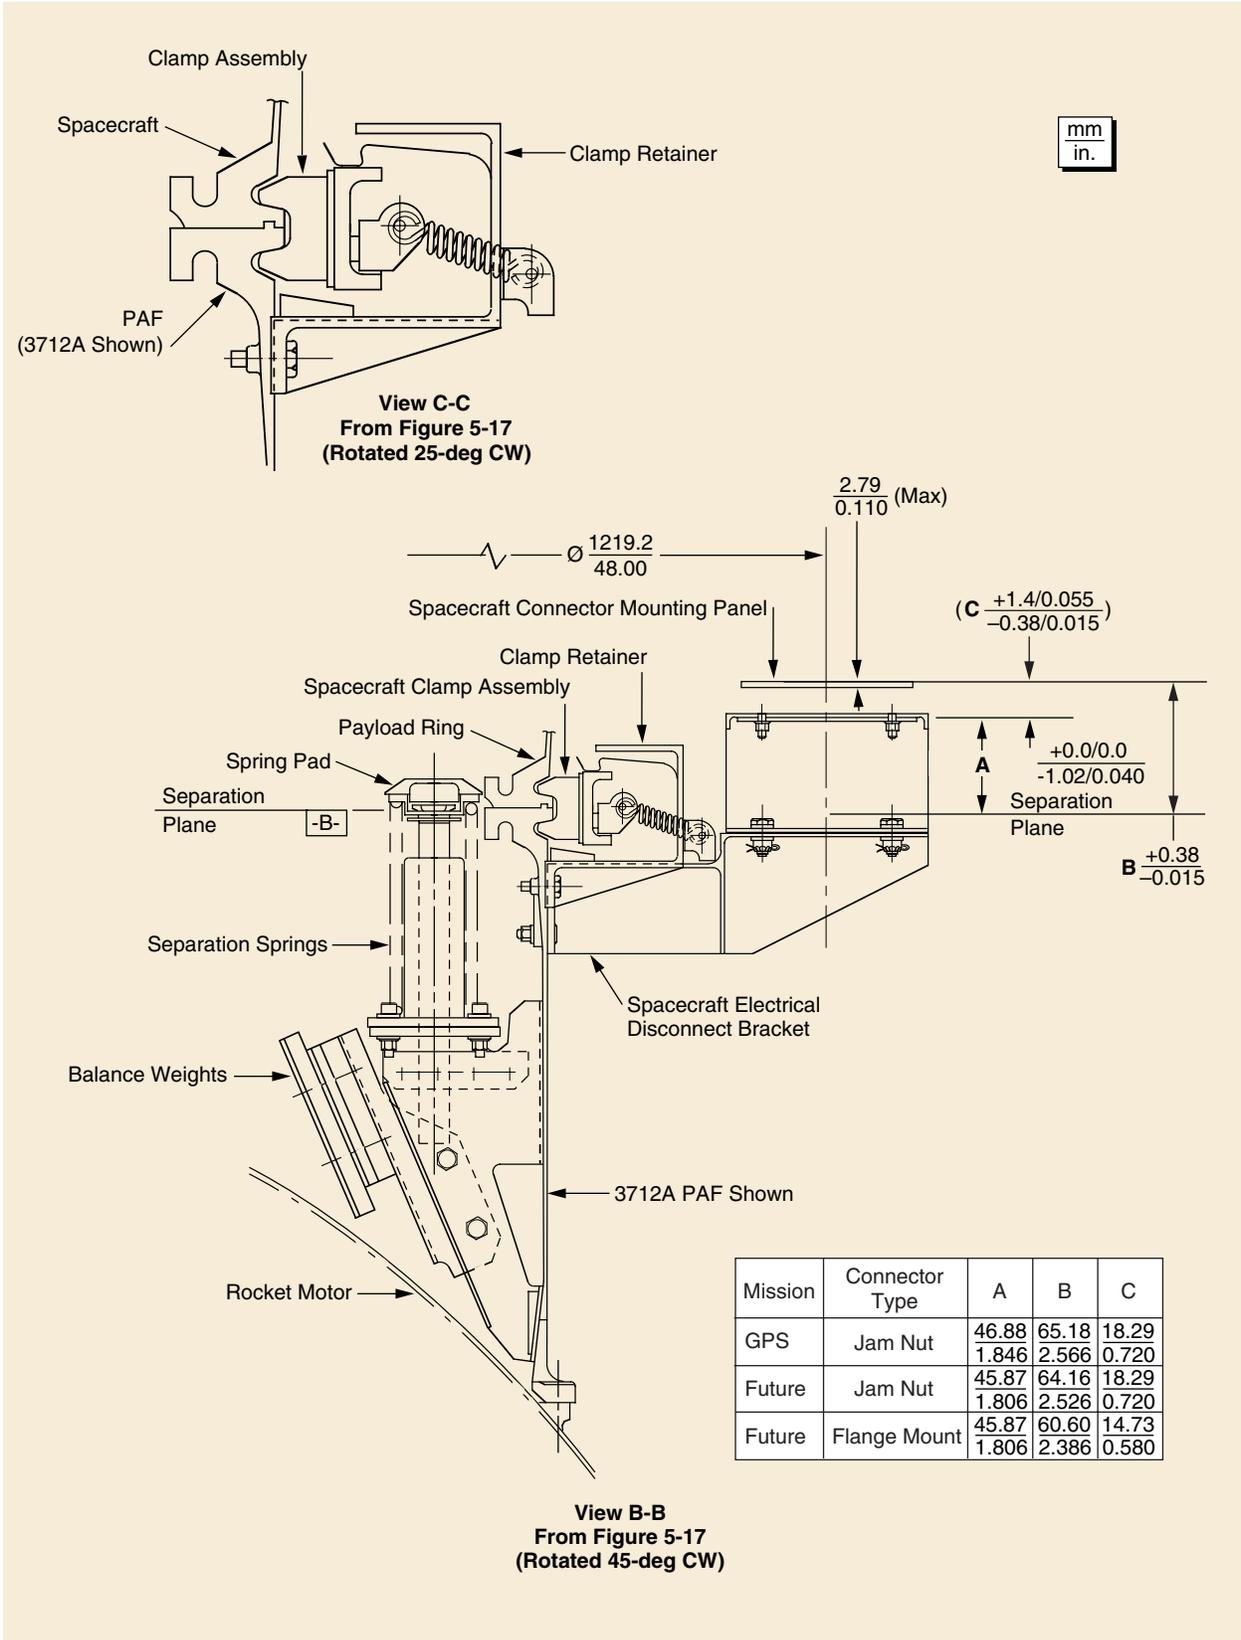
3712A Clamp Assembly and Spring Actuator
